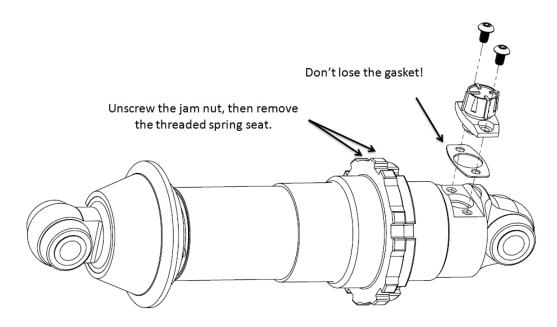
The shock adjustment knob must be removed for installation of the spring.
